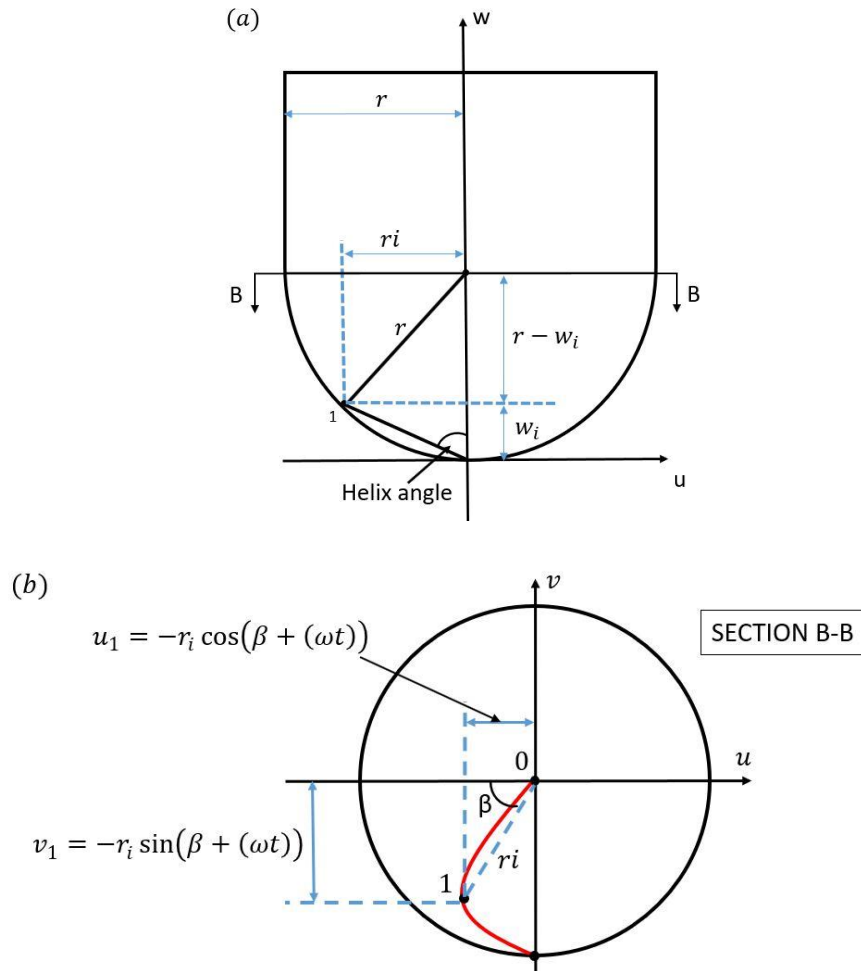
Definition of the geometry of a ball end cutting tool with helical cutting edge in (a) side view and (b) cross section view
